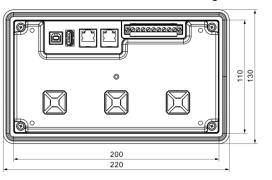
HPM6D Display Module Installation Dimensions (Unit: mm)
